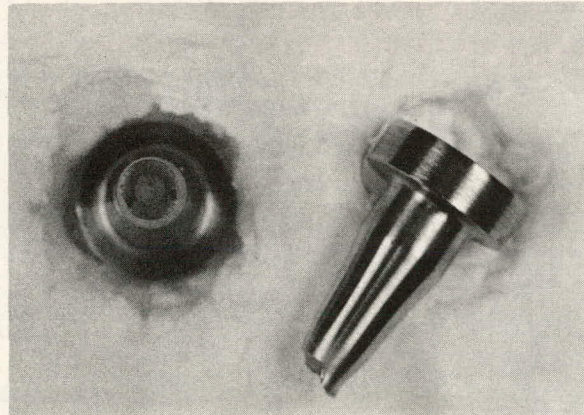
Fracture Surface of Shaped 4340 Specimen (Control)
